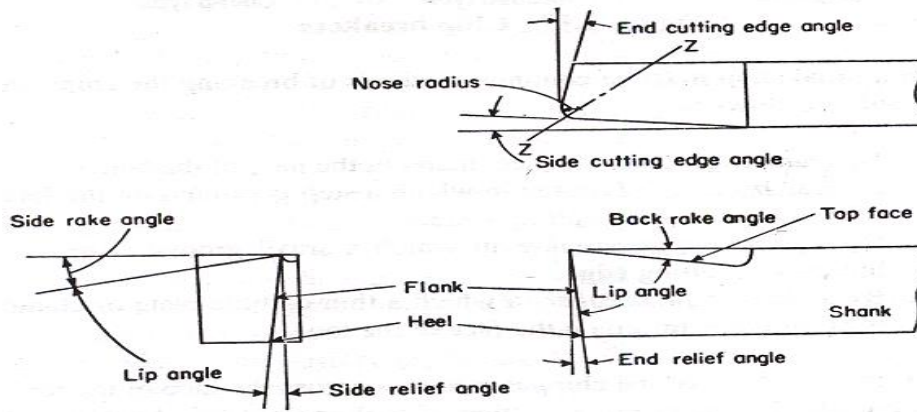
Tool nomenclature and tool angles (sec. 3.50 for tool signature)
